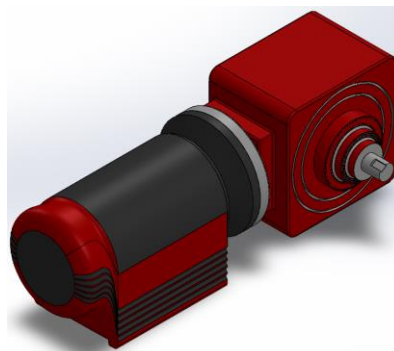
Worm-gear reduction gearbox is attached to a motor by using solidwork simulation.
